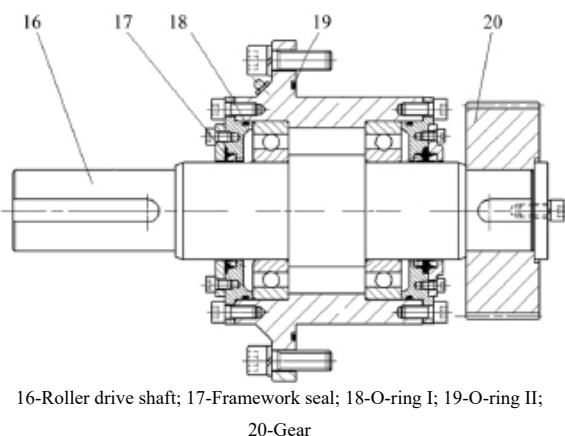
Traditional roller drive shaft sealing design principle and structural diagram
